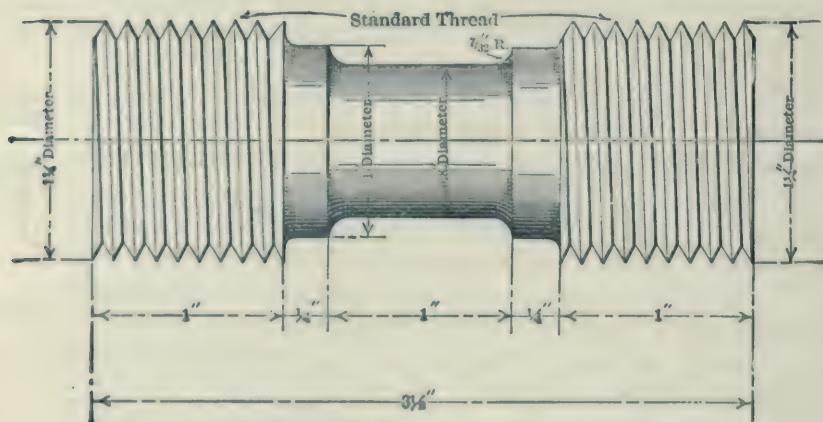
ARBITRATION TEST BAR. TENSILE TEST PIECE.
